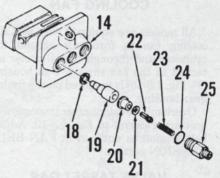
Partial exploded view of fuel injection pump used on all models except 834 and L54.
